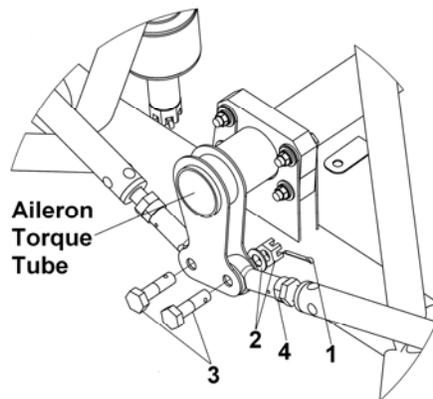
Aileron Inboard Pushrod to Torque Tube
